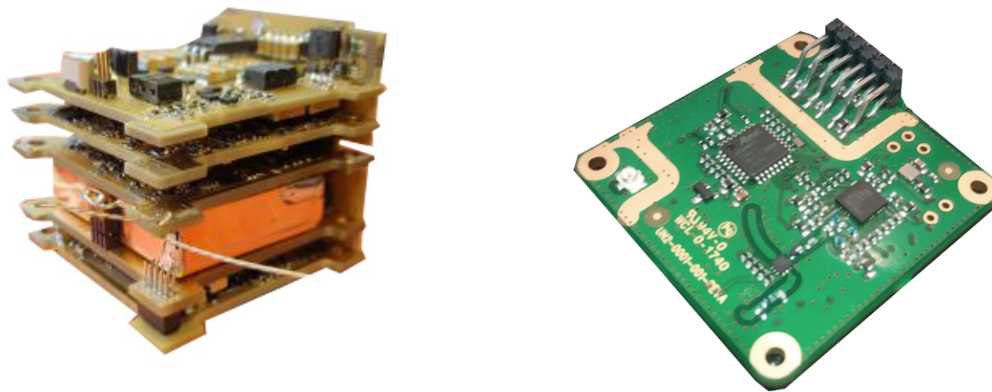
Typical internal configuration of a PocketQube (left) and detail of a PCB (right).
